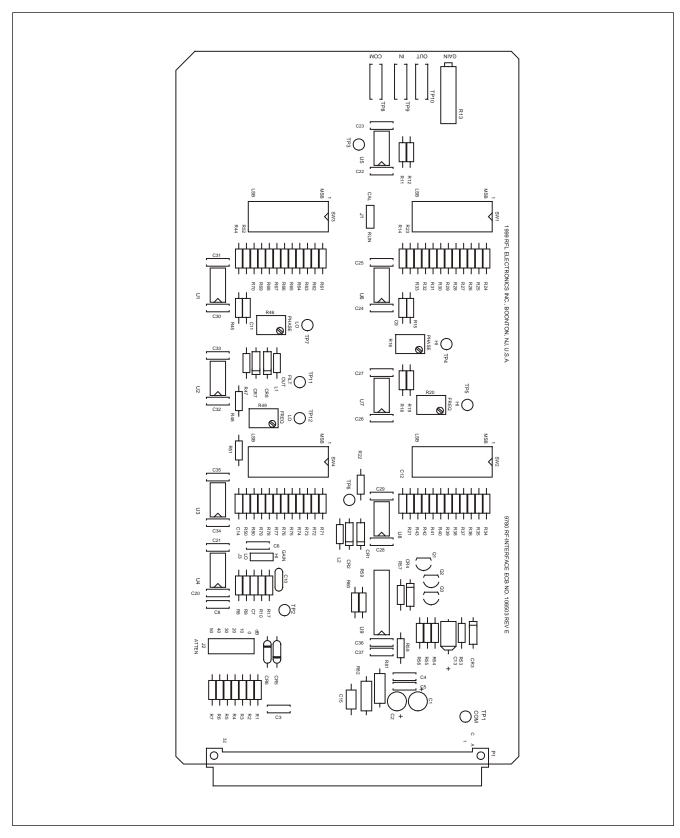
Component locator drawing, RFL 9780 RF Interface Module
